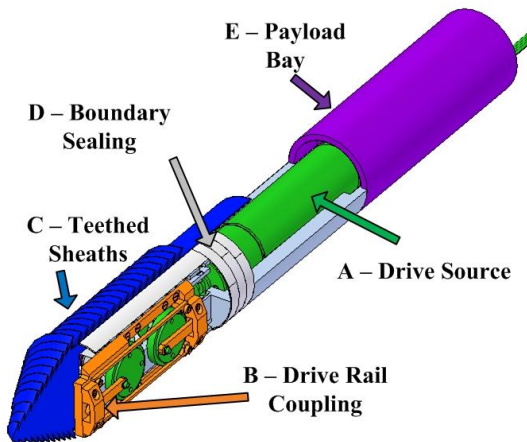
Model of the DRD004 prototype under construction with main elements labelled.
